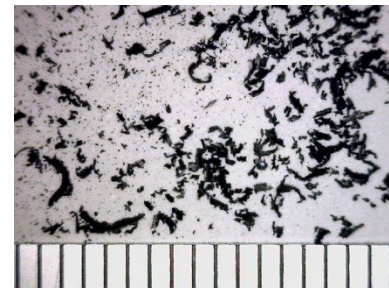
Cutting chips machined with Tool type No.1 (Helix angle 0°) (Up cut method)
